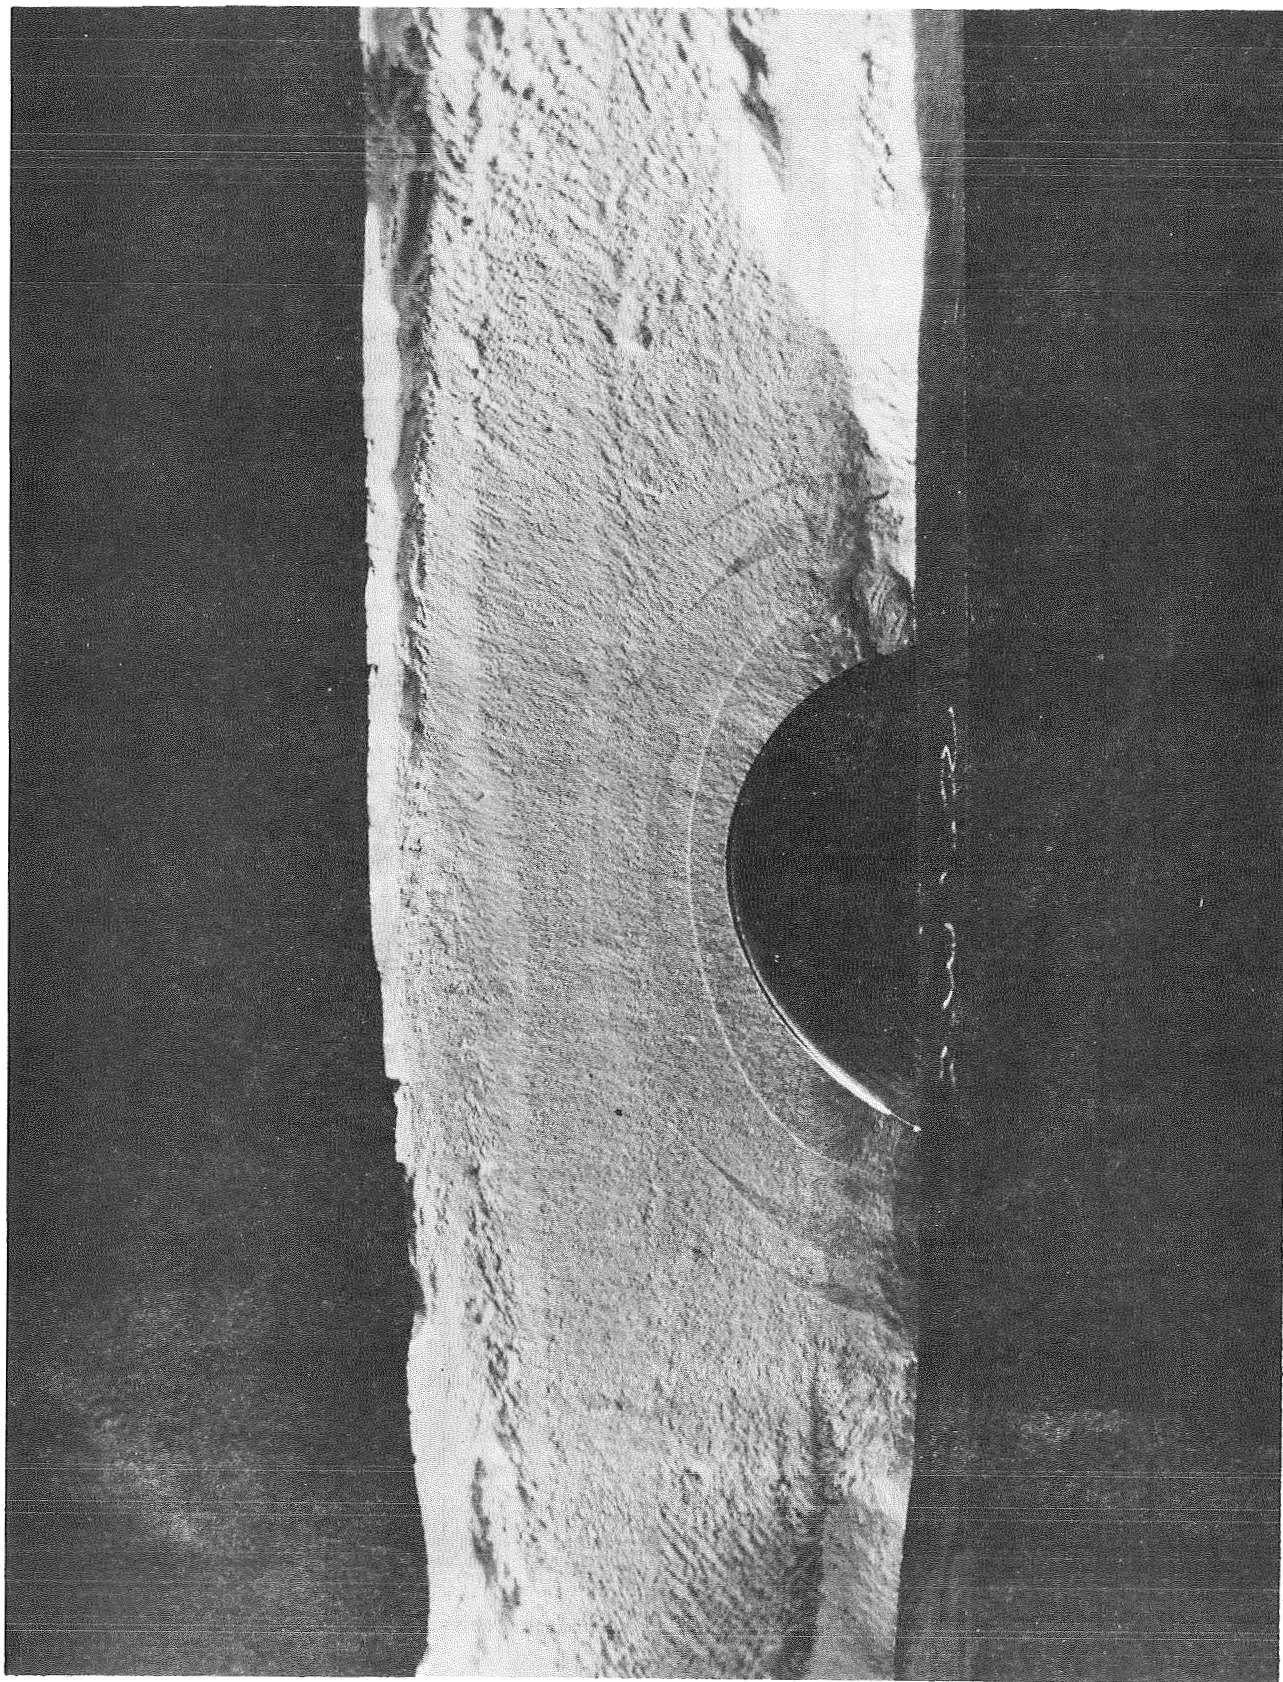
Fracture Face of Fatigue-Marked 2021-T81
